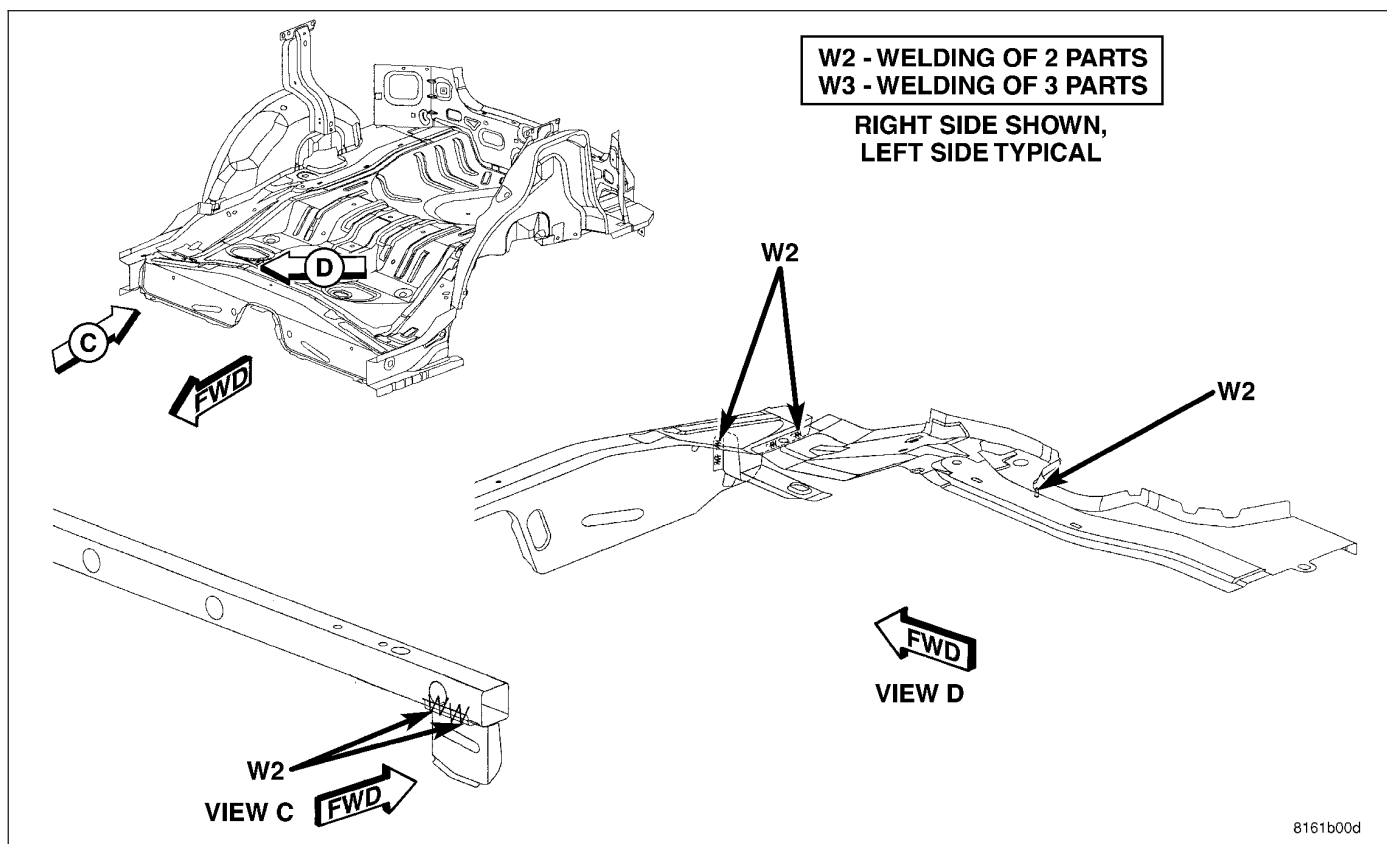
REAR FLOOR ASSEMBLY (13 OF 14)
